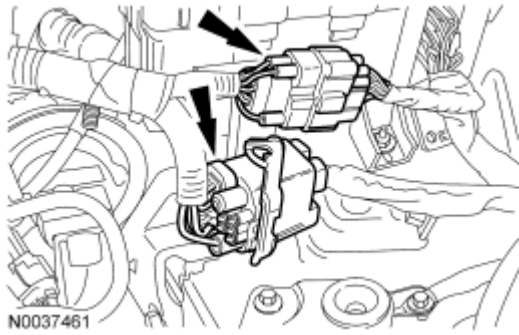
Locating Engine Wiring Harness Electrical Connectors
